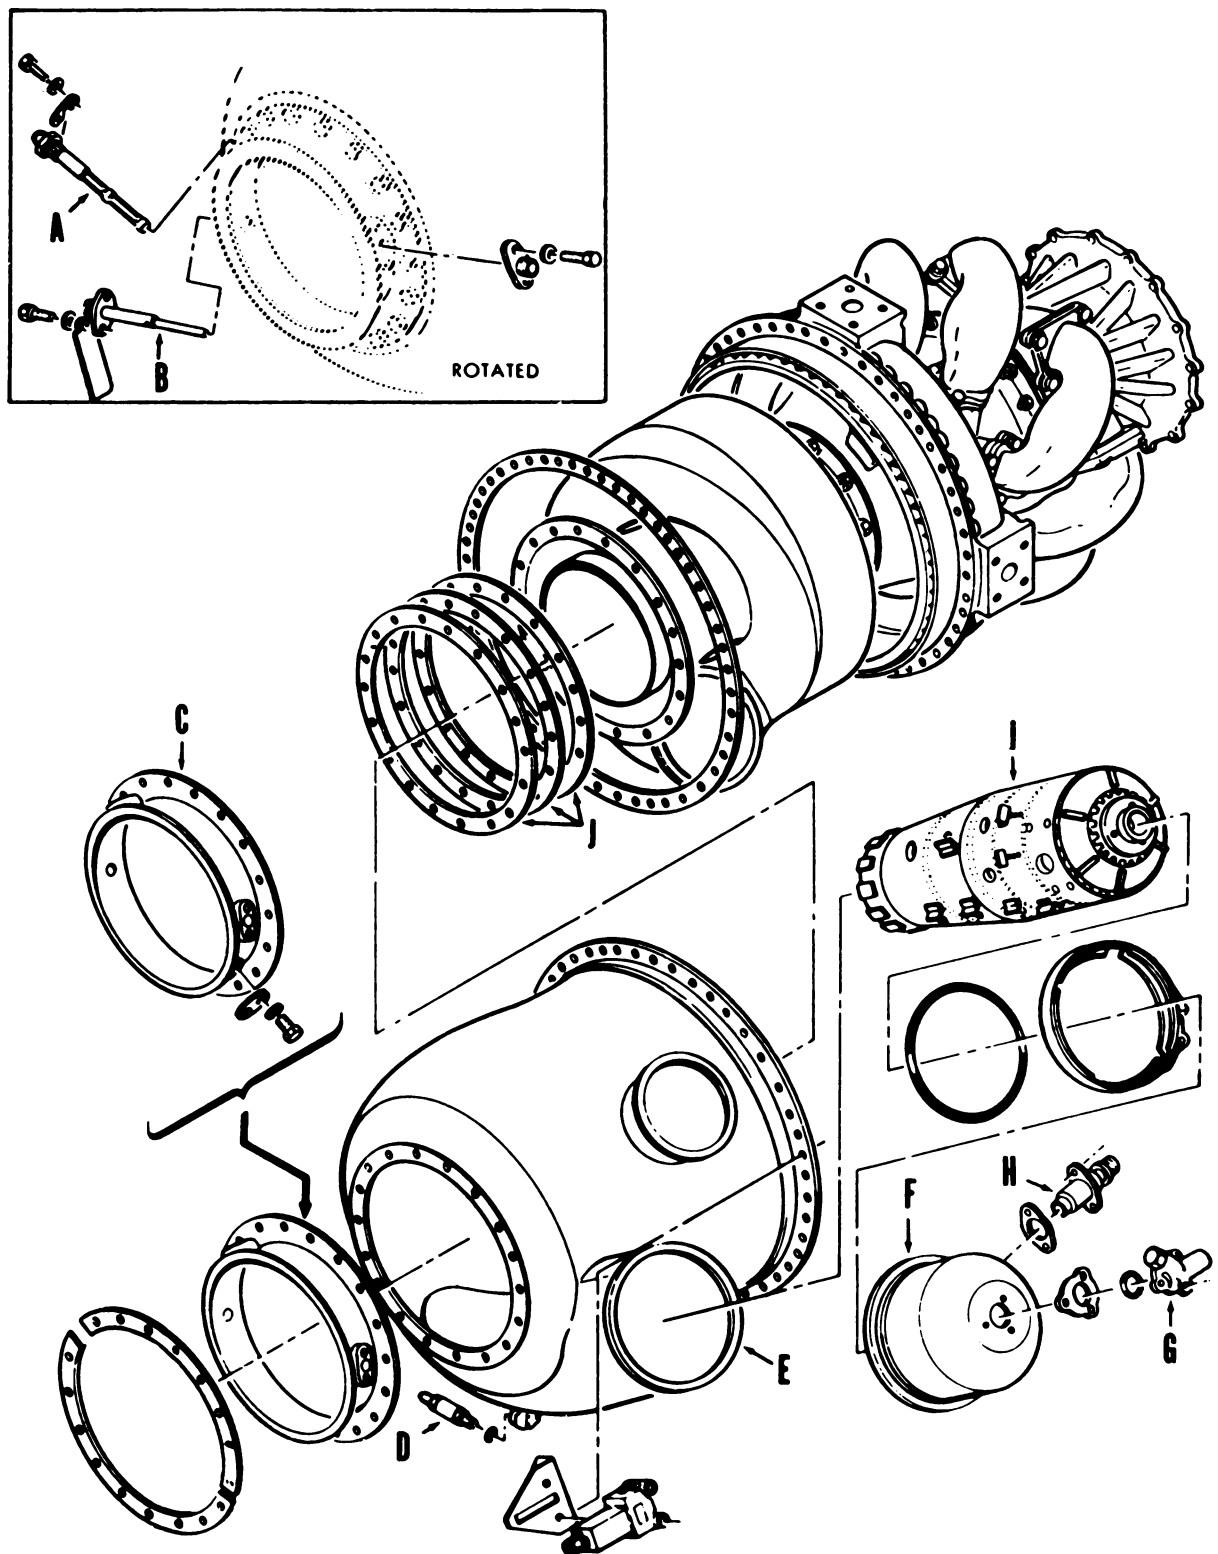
Pneumatic and shaft power gas turbine engine.
